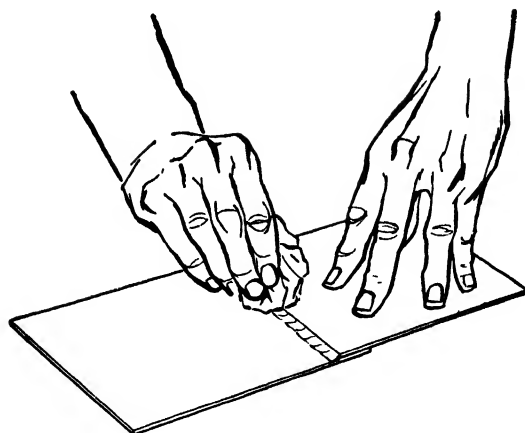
Keep the work clean while soldering by wiping it frequently with a damp cloth. When the job is done, wipe off all excess flux to promote cleanliness and prevent corrosion.
